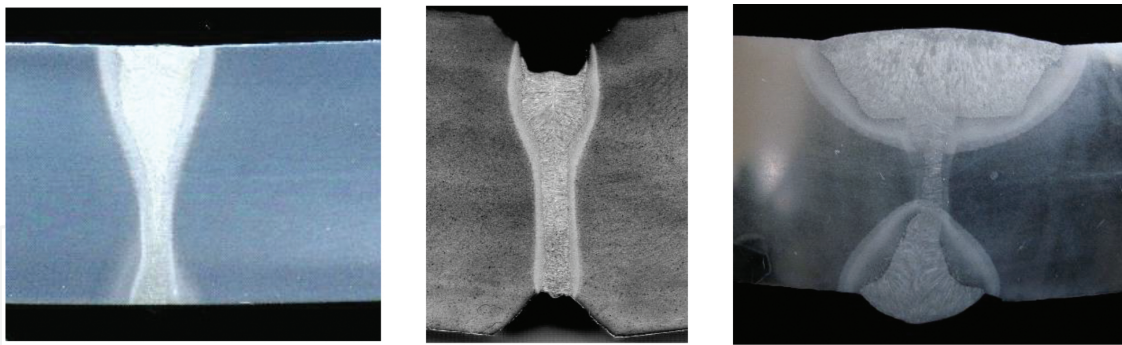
Macrosection of the one pass weld (left), three passes weld (center – first technological pass), right – technological pass and two filled passes by submerged arc welding. Depth is 15 mm left and 24 mm center and right. Material is steel X80.
